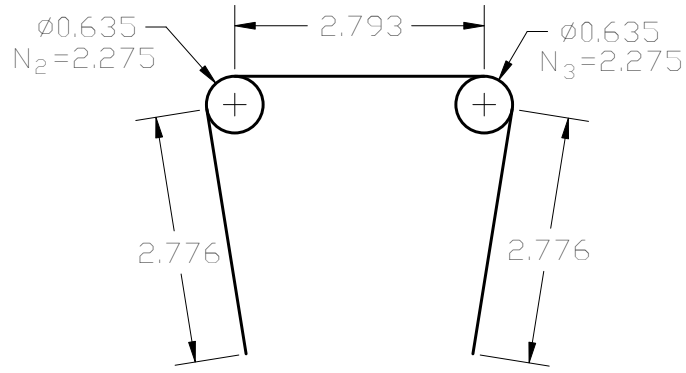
Dimensions (in cm) of the large coil mechanism.
